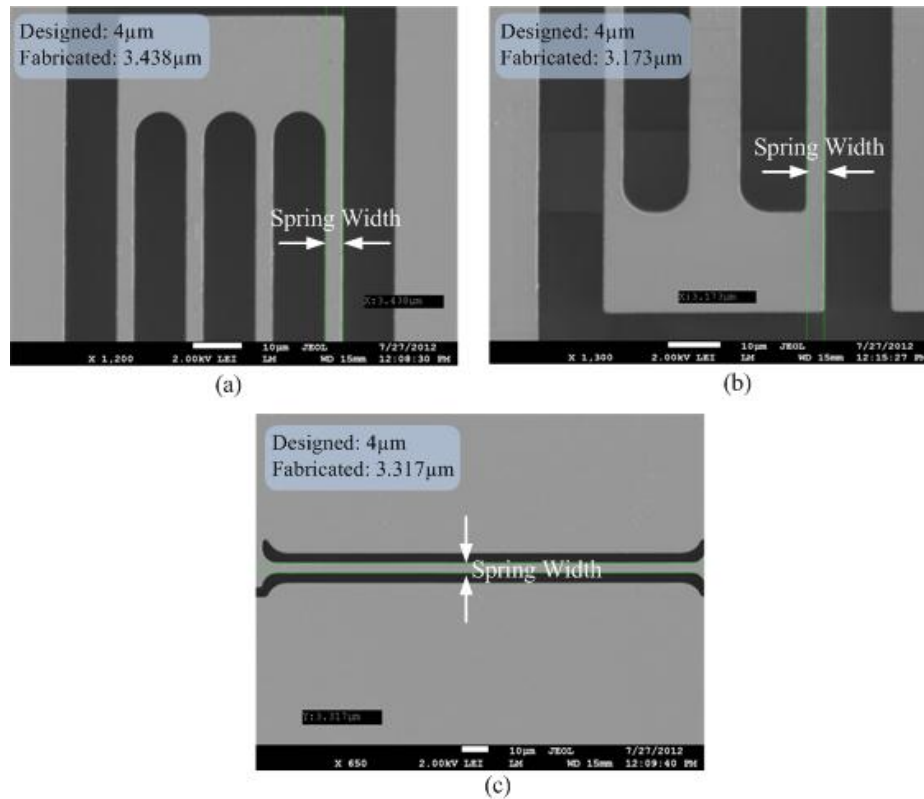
SEM pictures of (a) double-folded and (b) half-folded springs used in the drive mode, and (c) the clamped-guided-end spring used in the sense mode after fabrication.
